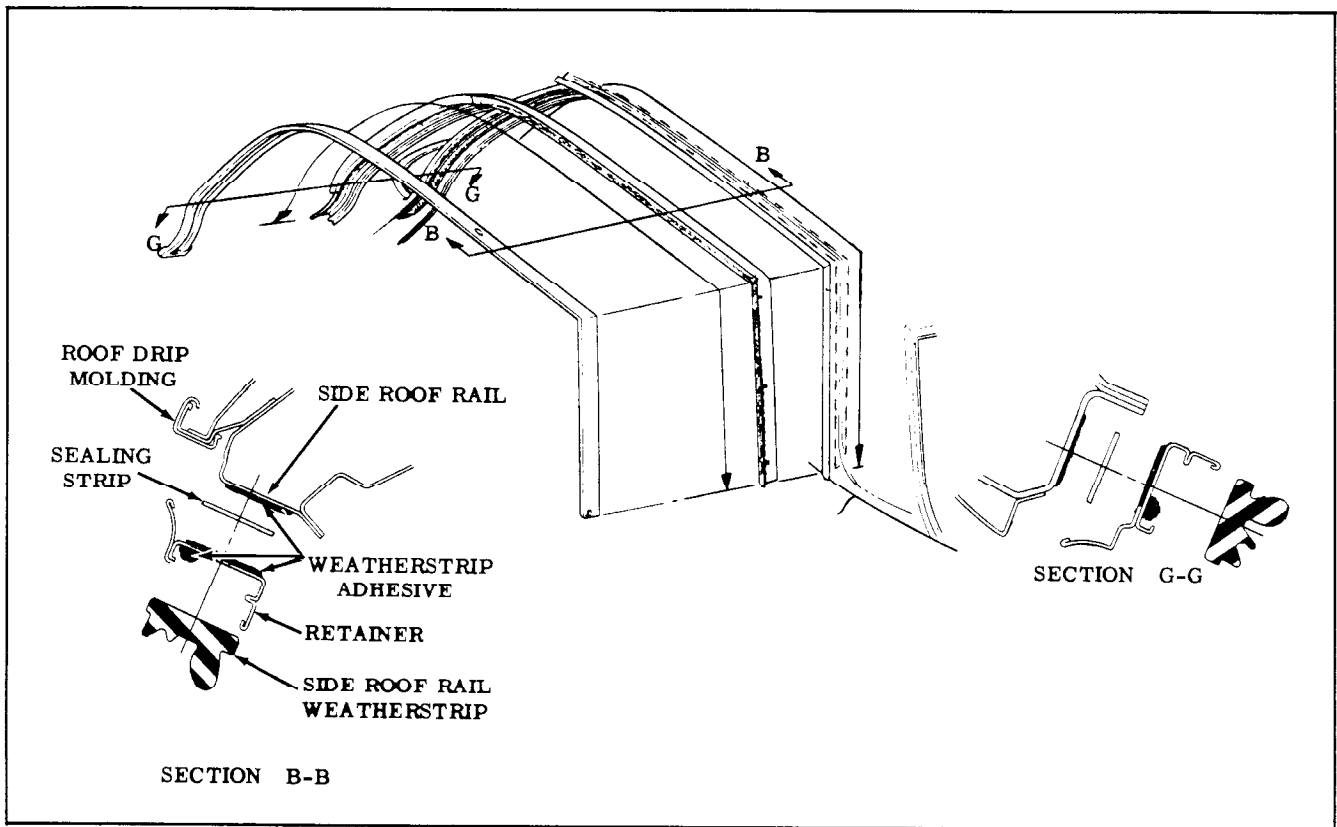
"47" and "39" Style Side Roof Rail Weatherstrip Assembly
